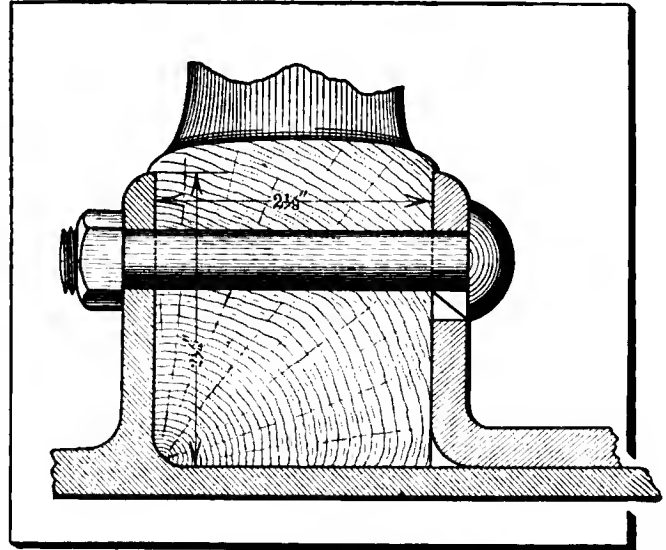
Section of a hub at the miter, showing depth of flange and scheme of clamping
